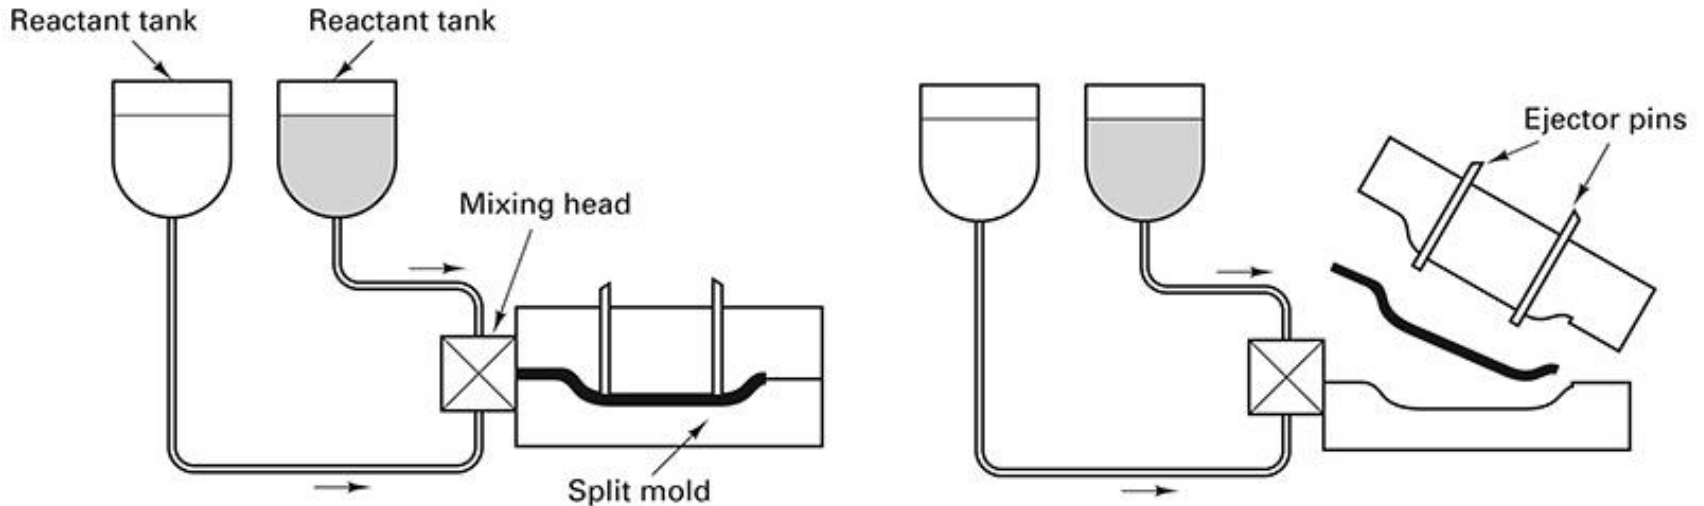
The reaction injection molding process. (Left) Measured amounts of reactants are combined in the mixing head and injected into the split mold. (Right) After sufficient curing, the mold is opened and the component is ejected.
